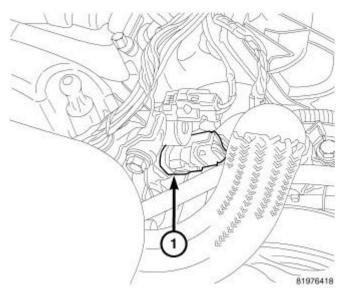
Oil Temperature Sensor Courtesy of CHRYSLER GROUP, LLC
